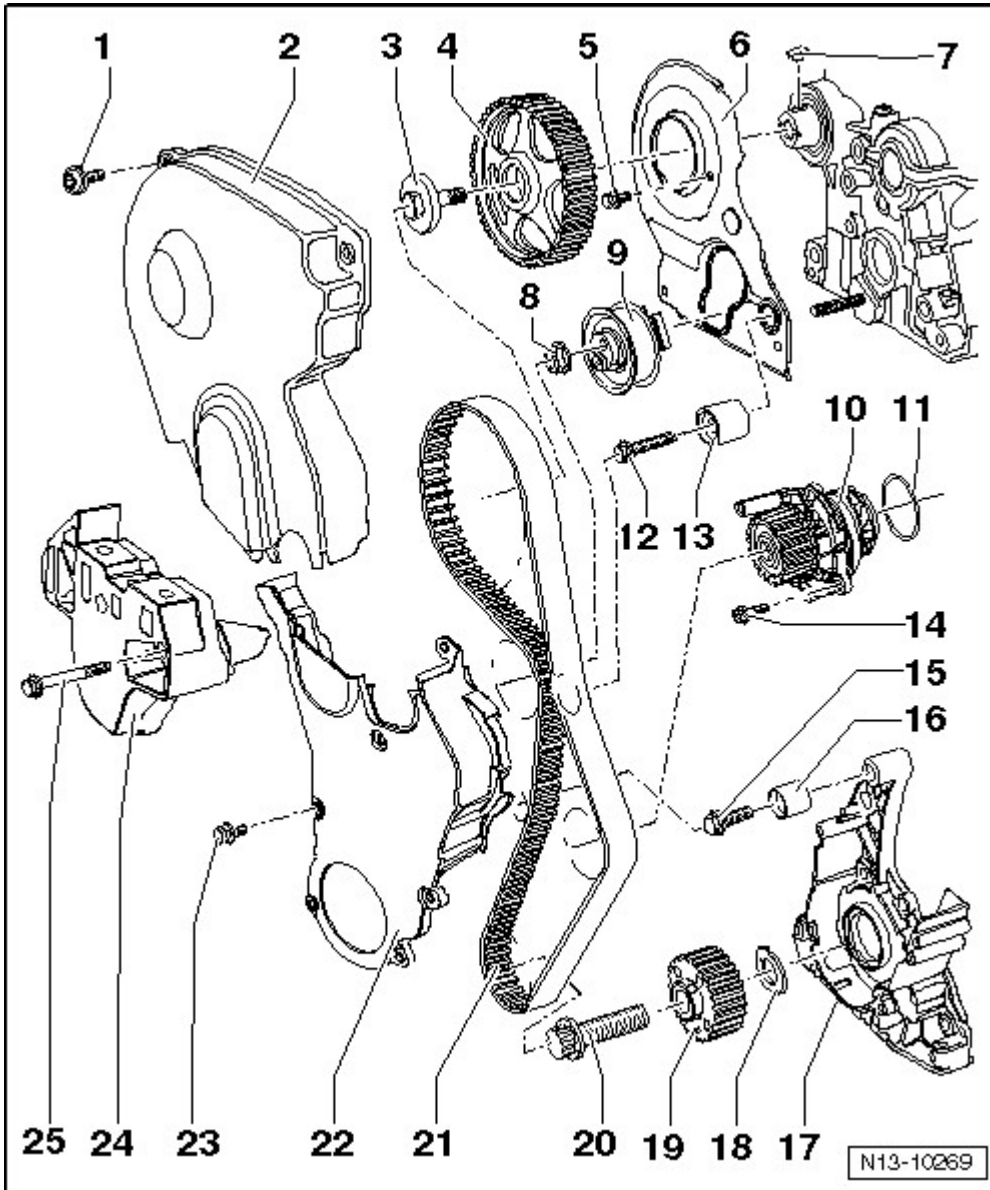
Toothed Belt Drive, With Divided Toothed Belt Guard Overview
